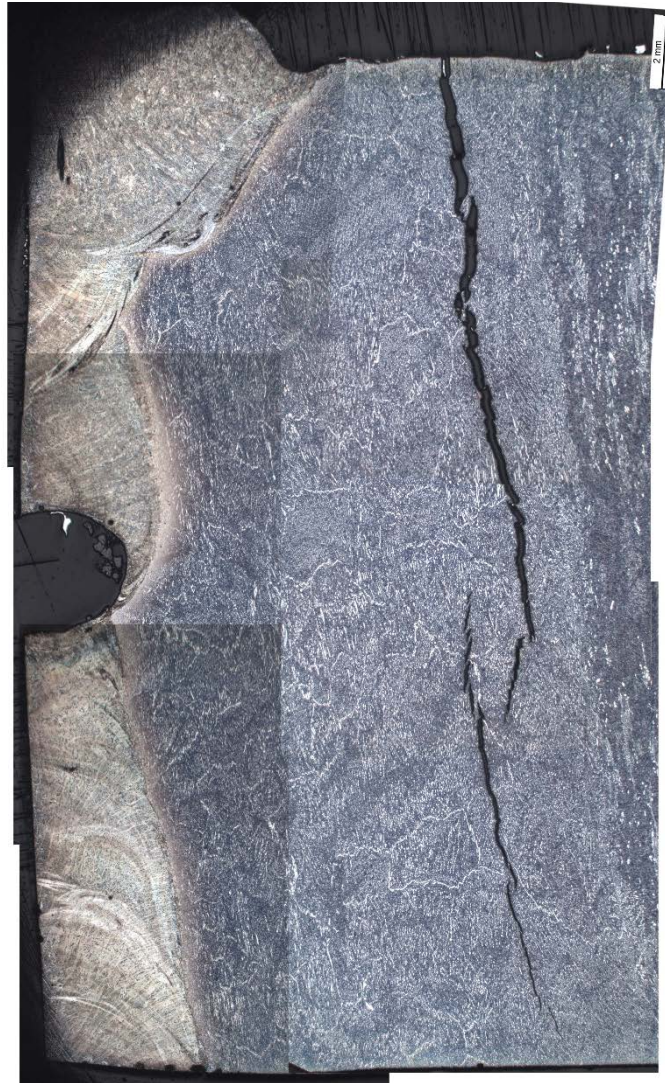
Cross section sample from a cracked detail: crack initiation at the plate surface close to the weld (left), crack propagation nearly through the entire section thickness, with occasional crack branching.
